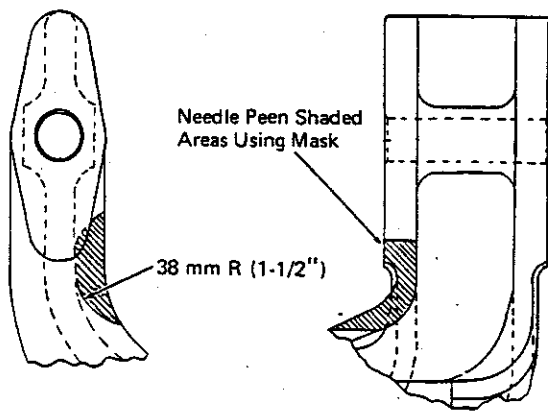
Pinion End Axle Cap Gearcase Support Arm Needle Peening
